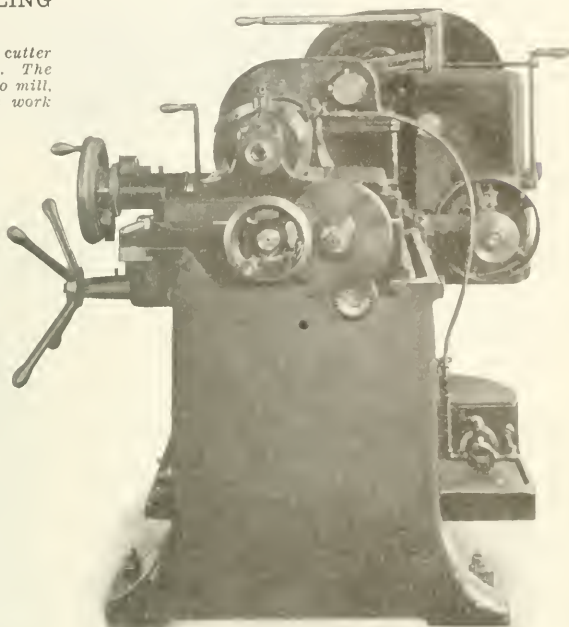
End View of Lees-Bradner Thread Milling Machine shown in Fig. 1
